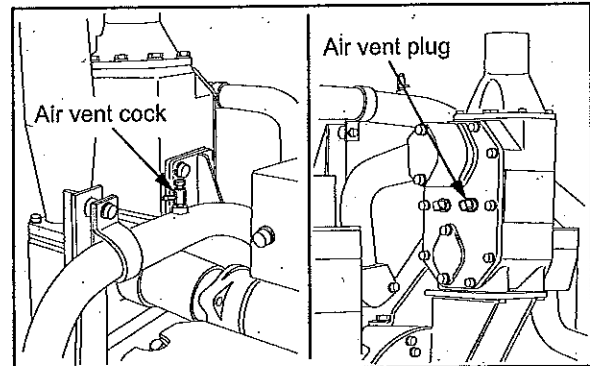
Air vent cock and plug (Air cooler cooling system)
